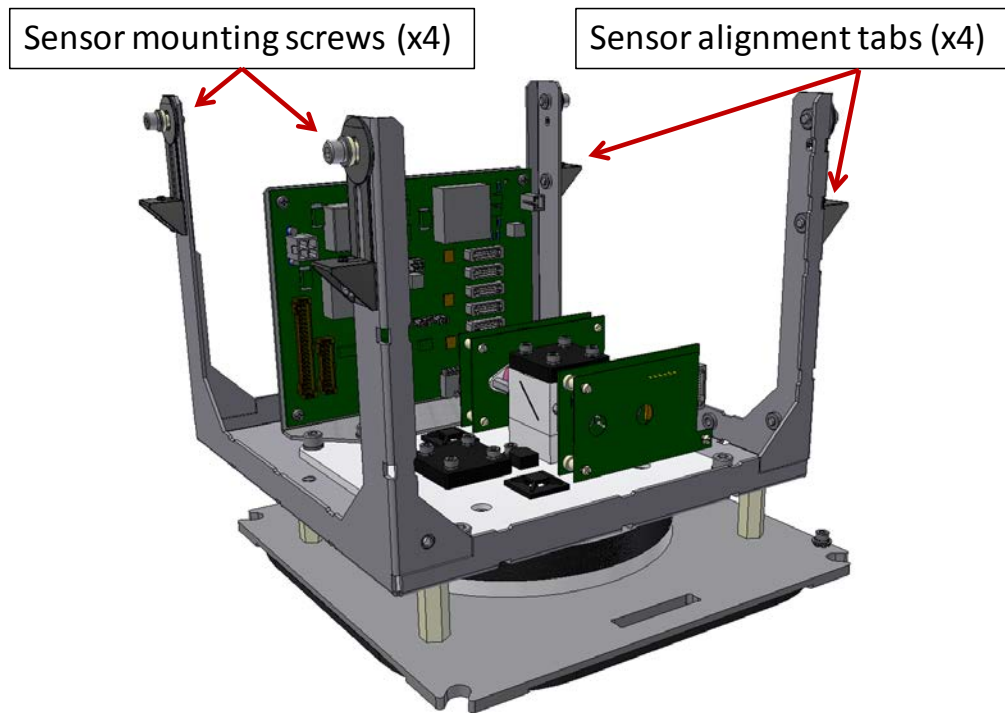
Mounting hardware in MXIR Receiver Assembly
